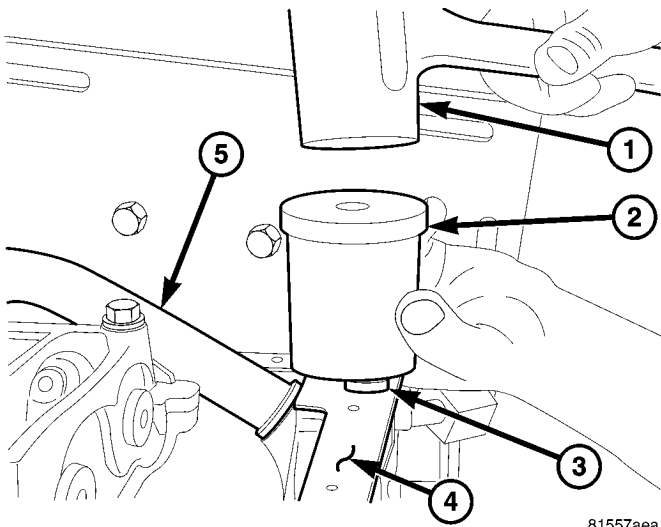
OIL PRESSURE RELIEF VALVE SEATING
